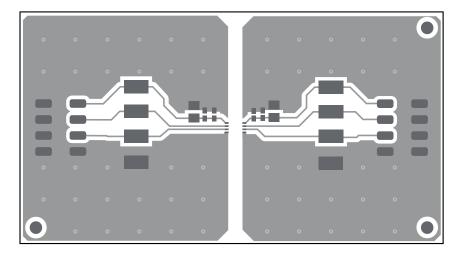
ISO6521REUEVM PCB Layout - Top Layer
